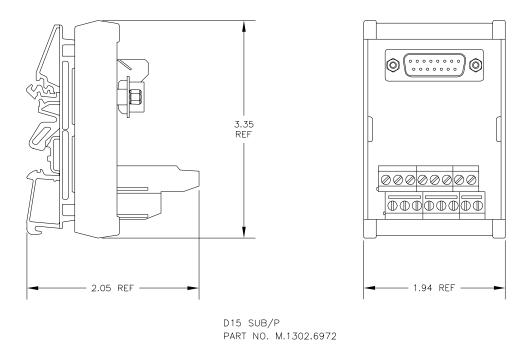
Aux Feedback Port Breakout Board Dimensions
